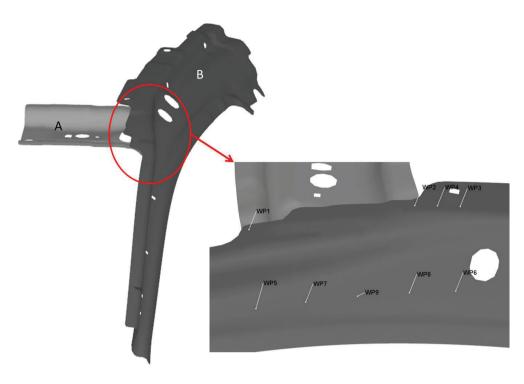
An A-pillar assembly. The two parts are joined by nine spot welds.
